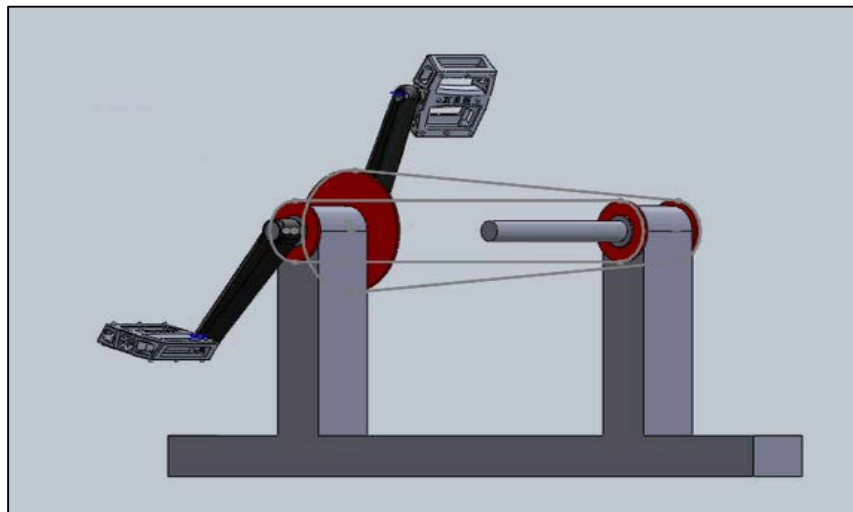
CAD Model of Reverted Compound Chain and Sprocket
